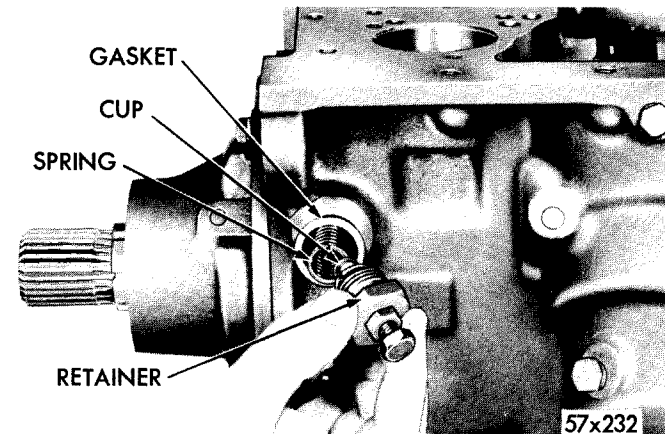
Removal and Installation of Regulator Valve Retainer and Gasket
